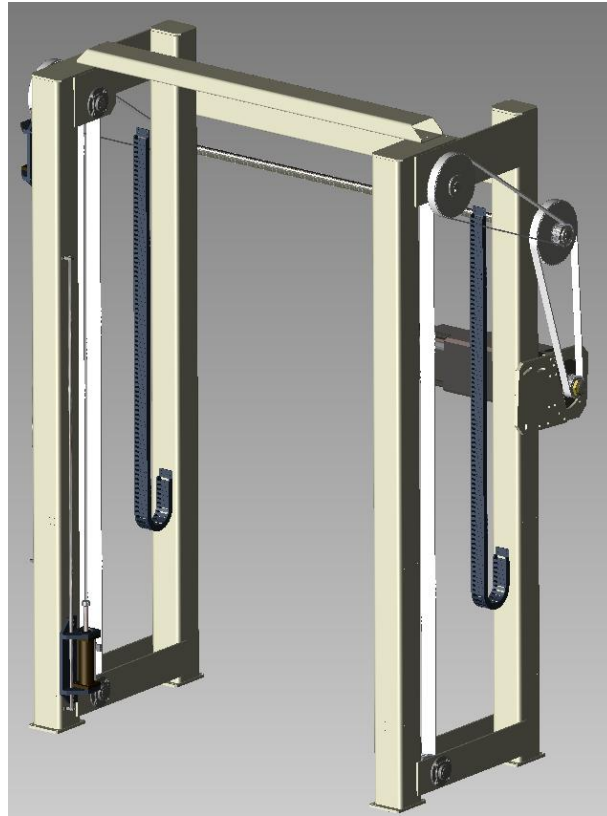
Linear Test Bed Frame and Drive Assembly
